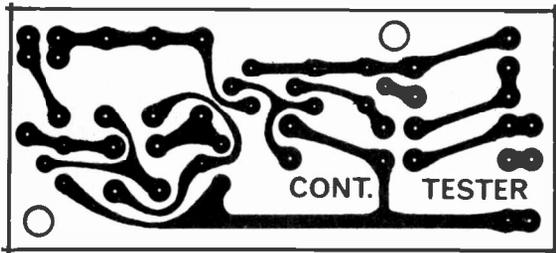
The pcb pattern shown full size (73mm x 33mm).
